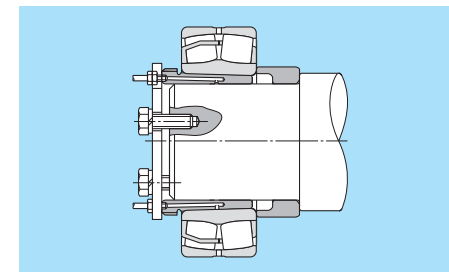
Installation using hydraulic withdrawal sleeve
